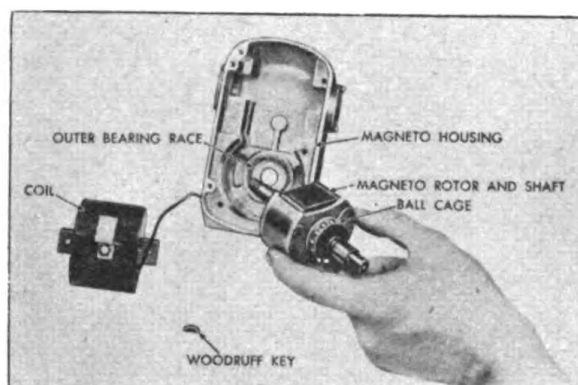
Removing Magnet Rotor and Shaft Cage Assy.
